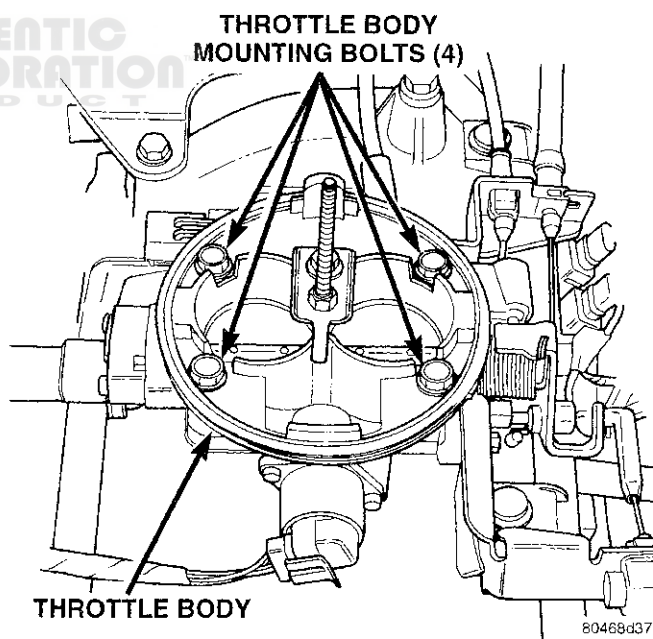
Throttle Body Mounting Bolts—3.9L/5.2L/5.9L ENGINES—Typical
